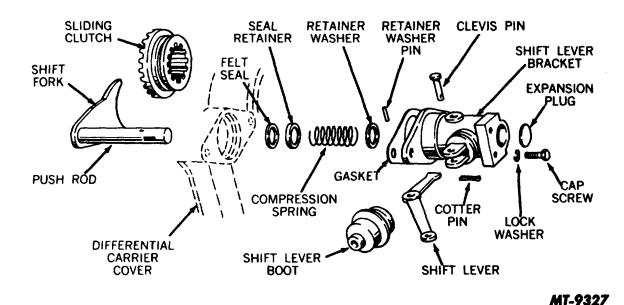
Vacuum-Operated Lockout Mechanism (Exploded View)
